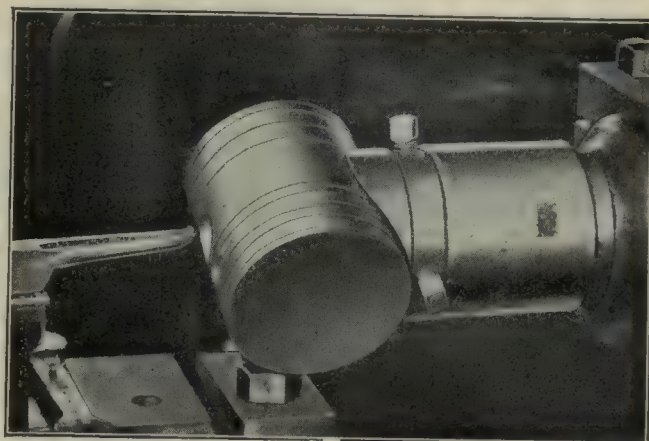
FINISH-BORING PISTON-PIN HOLES
